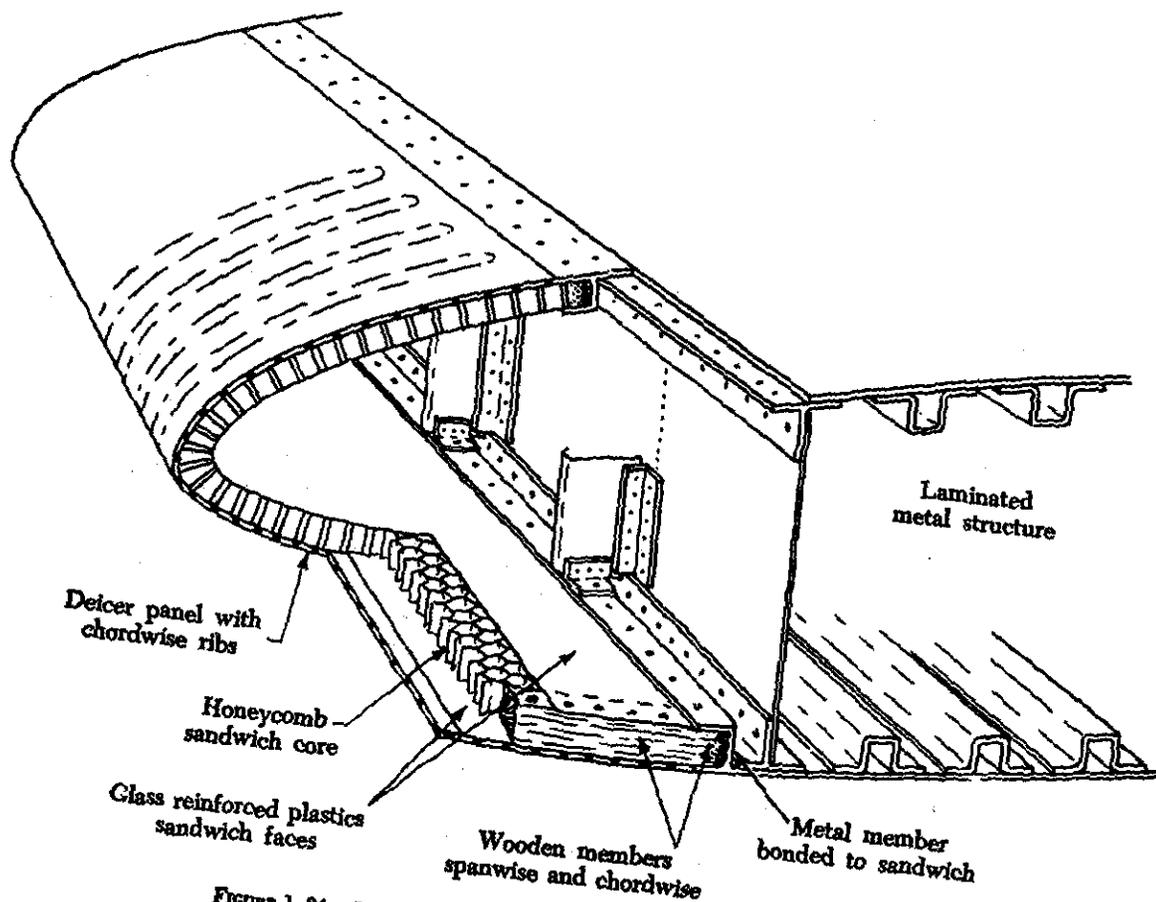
Leading edge sandwich material bonded to metal wing member.
